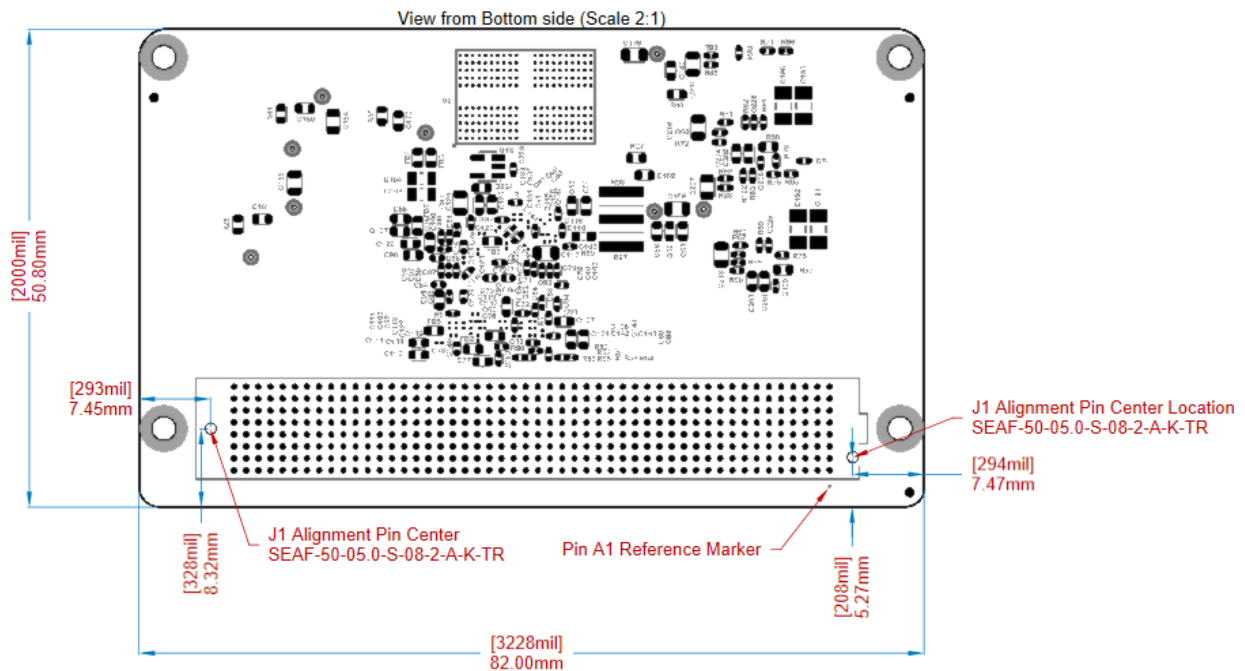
MitySOM-A5E Mechanical Outline, View from Bottom
